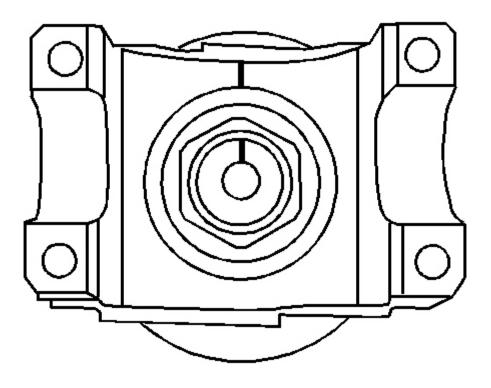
View Of Pinion Shaft & Pinion Yoke Alignment Marks Courtesy of GENERAL MOTORS CORP.
